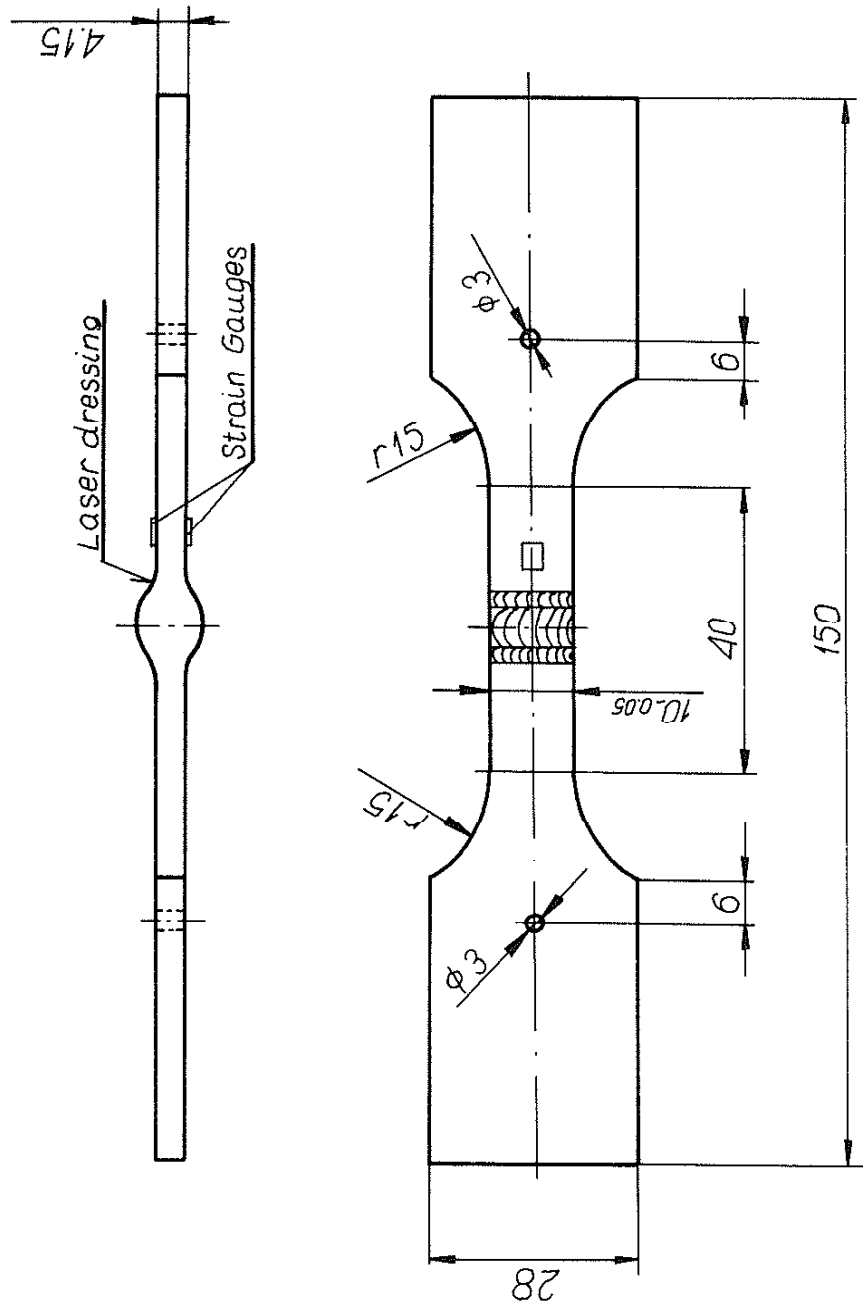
Fatigue test piece of laser-dressed bead on plate.
